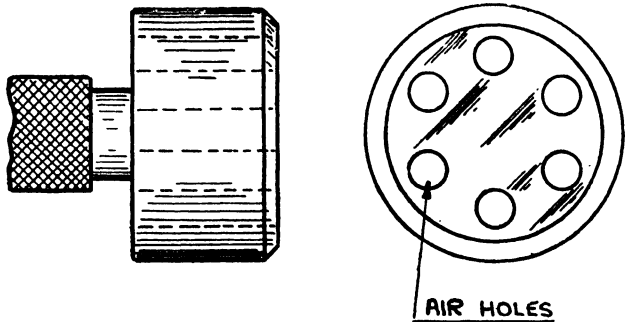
PLUG GAUGE WITH AIR HOLES
